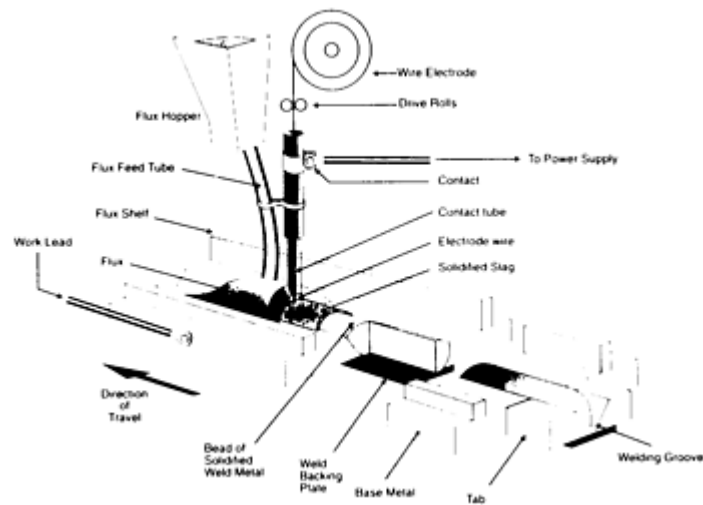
SCHEMATIC SHOWING KEY COMPONENTS OF AUTOMATIC SUBMERGED ARC WELDING SETUP
